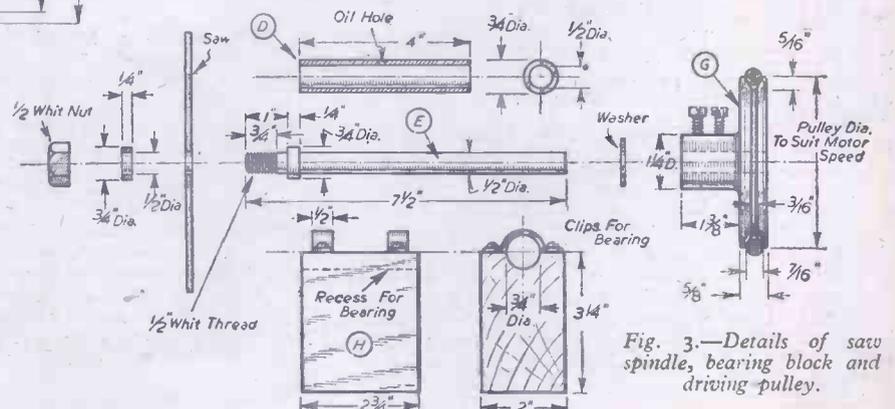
Details of saw spindle, bearing block and driving pulley.
